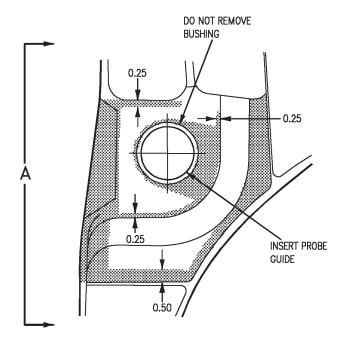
Center Fuselage Bulkhead Y470.500, Inner Wing Lower Lug Attach Point; Inspection Areas, Scan Directions, and Typical Flaws
